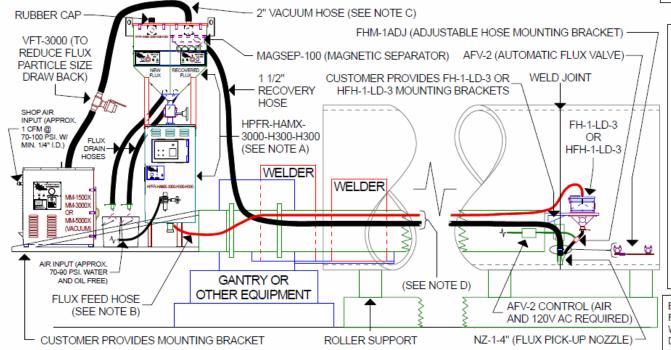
I.D. GIRTH WELD
